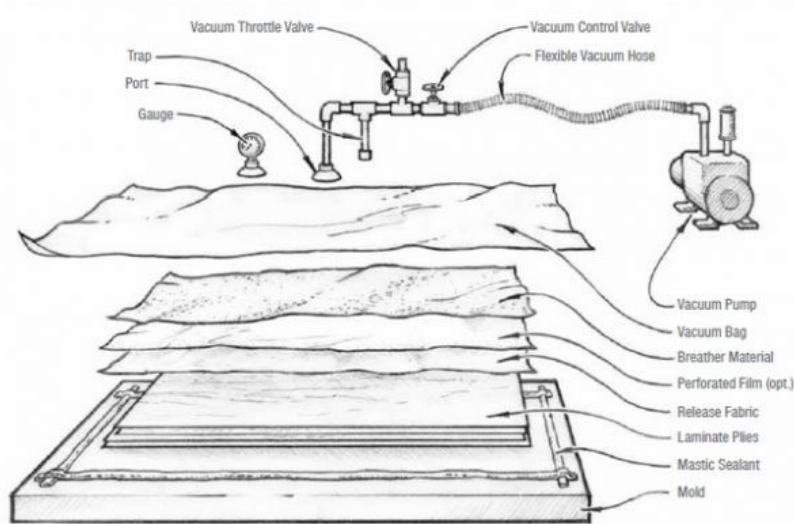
Vacuum bag layup technique for closed molding carbon plate manufacturing [49]
